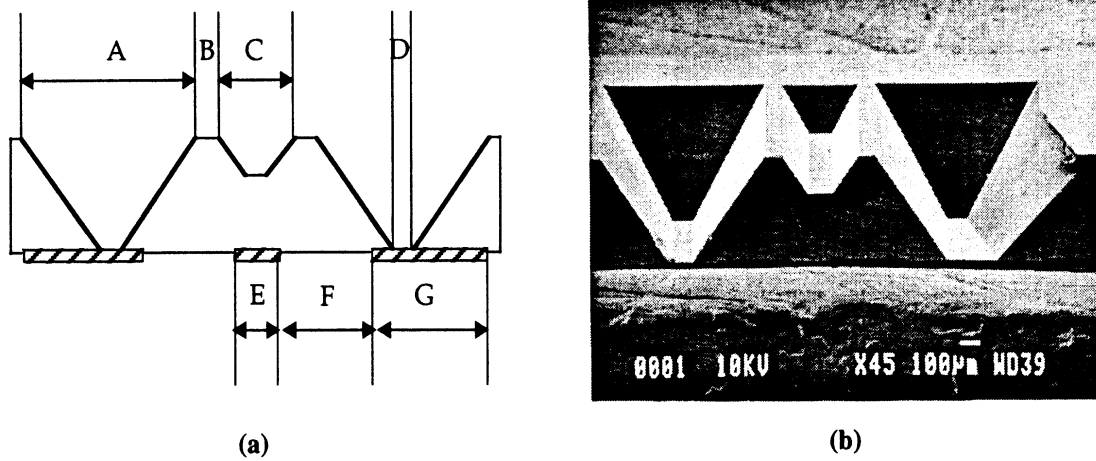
(a) Front view drawing of a microstrip printed on an inverted lower package with dimensions of $A=850$, $B=100$, $C=400$, $D=150$, $E=210$, $F=380$, $G=750$ and conductors that are indicated as hashed lines. All dimensions are in microns. (b) SEM photo of the inverted lower package developed during the two-step etch procedure.
